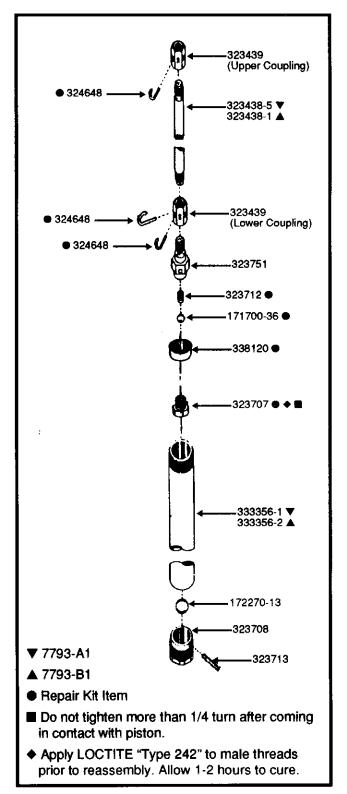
Pump-Tube Assembly for Models 7793-A1 & 7793-B1
